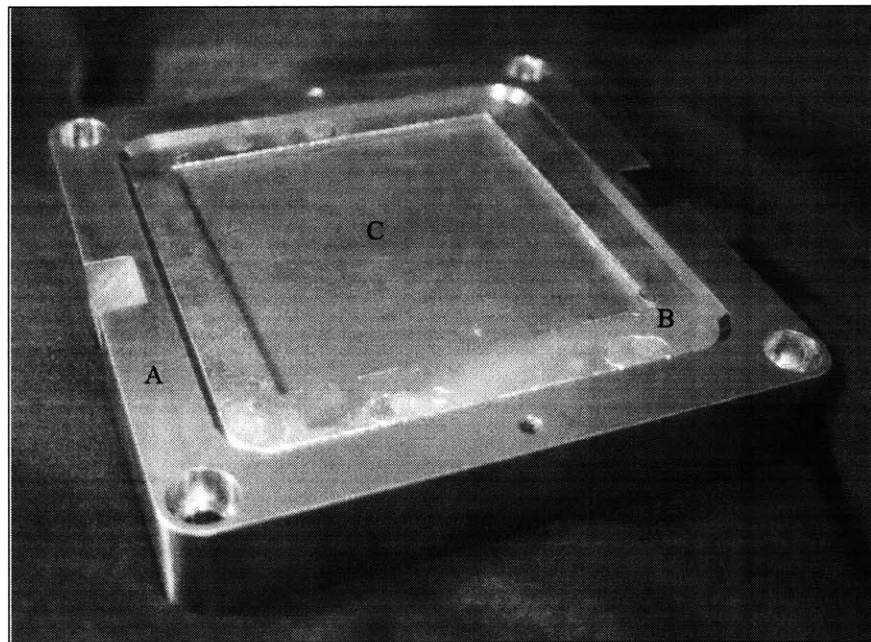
Picture of the 2-D Encapsulation Assembly
